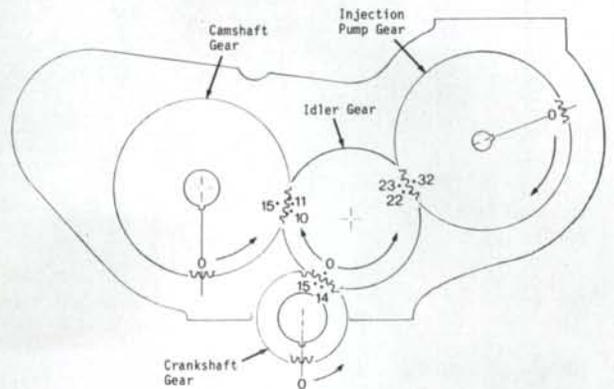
View showing timing gears and related parts used on six-cylinder engines.
